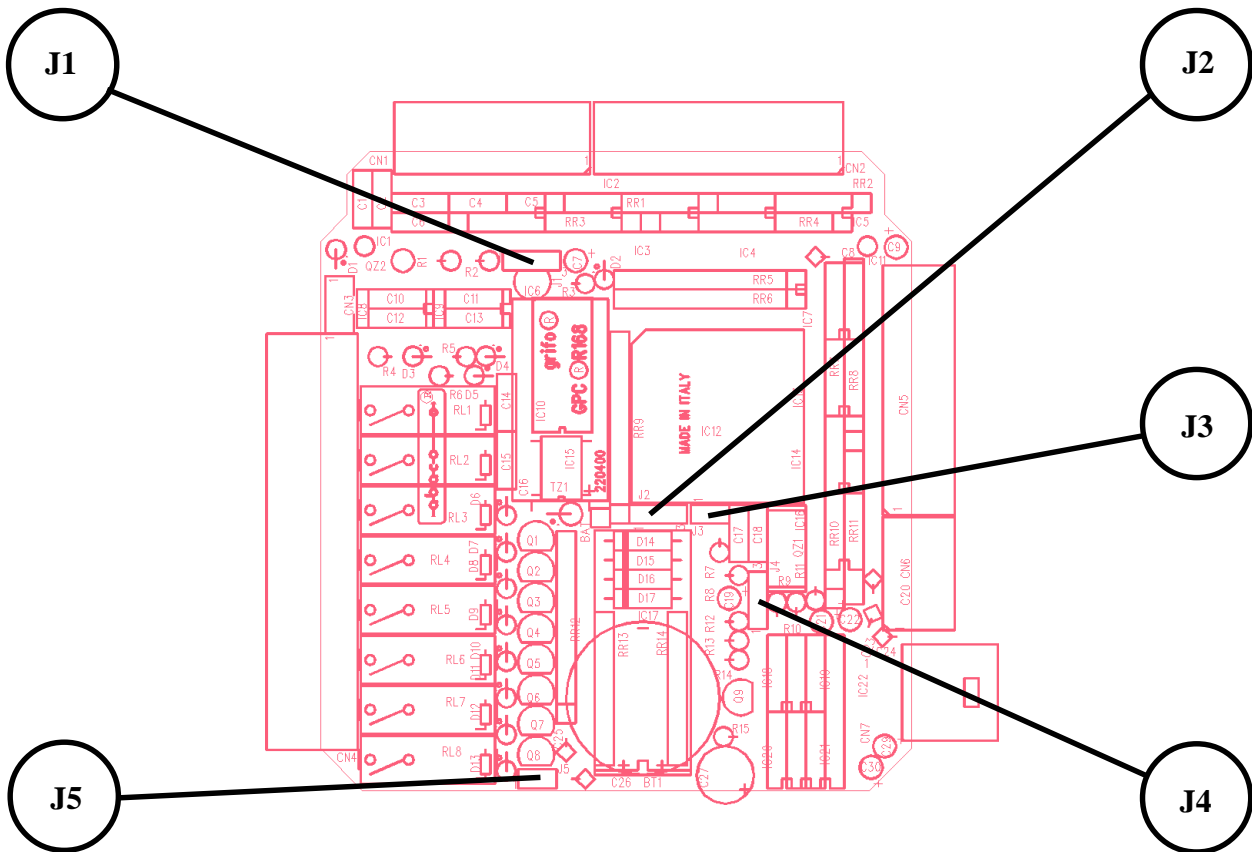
GPC® R168 JUMPERS LOCATION ON COMPONENT SIDE
